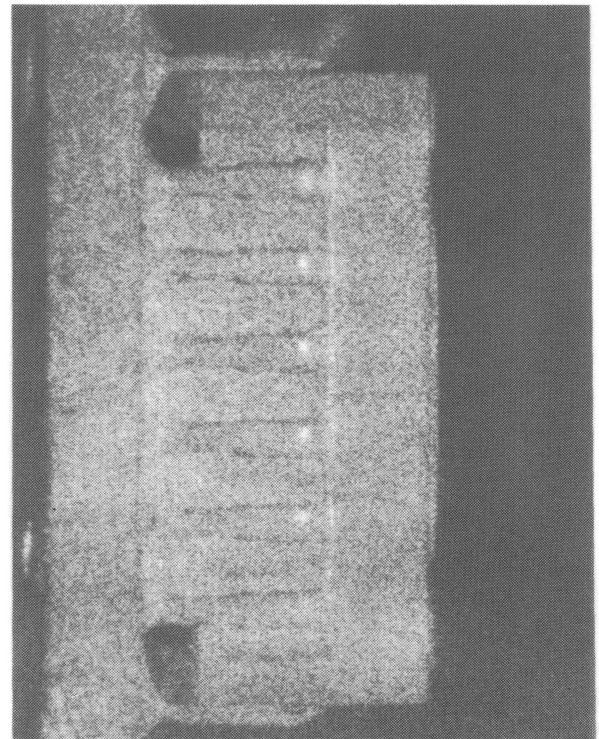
Image produced during reconstruction of the double-exposure heterodyne hologram of the component board assembly under the condition of no load.
